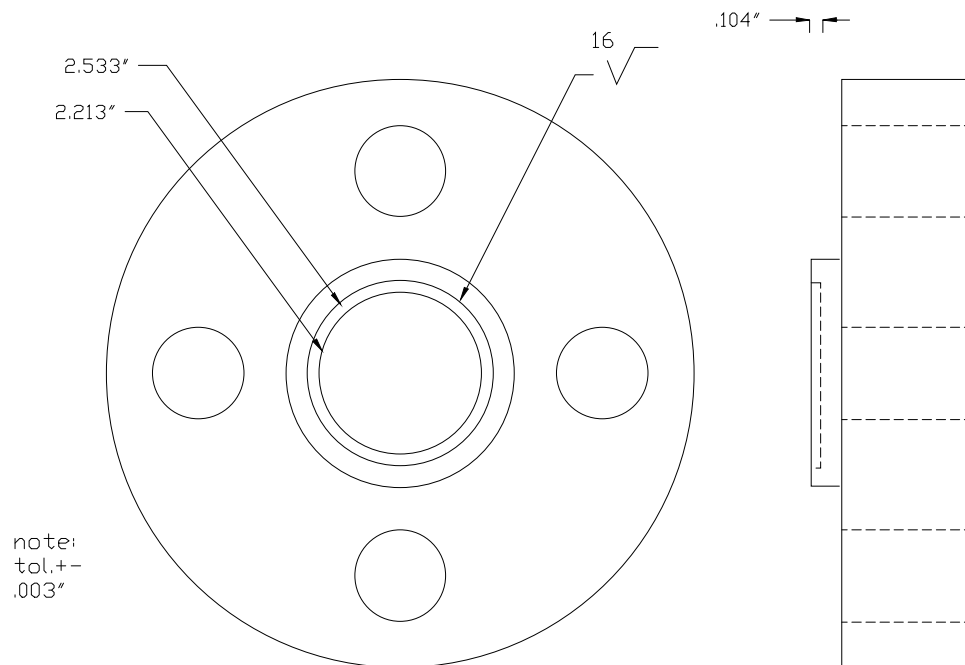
Design drawing of removable flange for polymeric seal (vessel cap).
